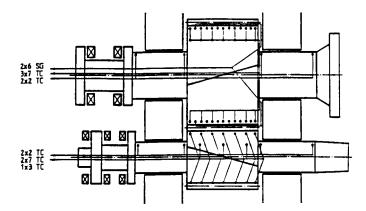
Instrumentation of test gear rotors. (Source: MAAG Gear Company.)
